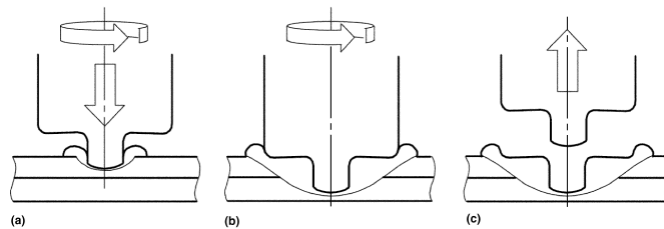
(a) Plunging; (b) Bonding; (c) Drawing out.
